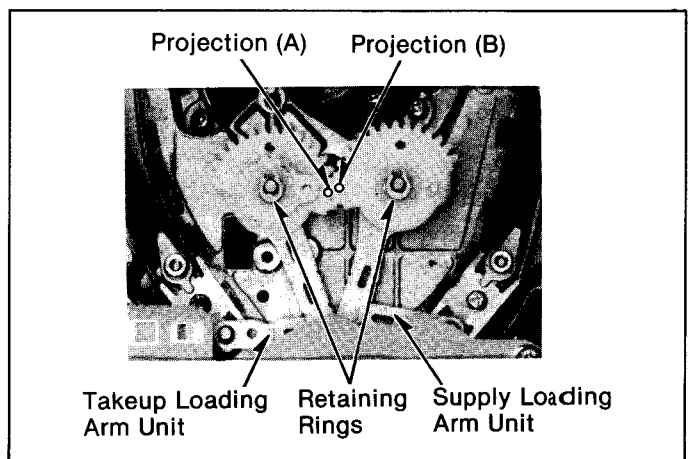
Assembly and Adjustment of Gears and Rod-(1)
